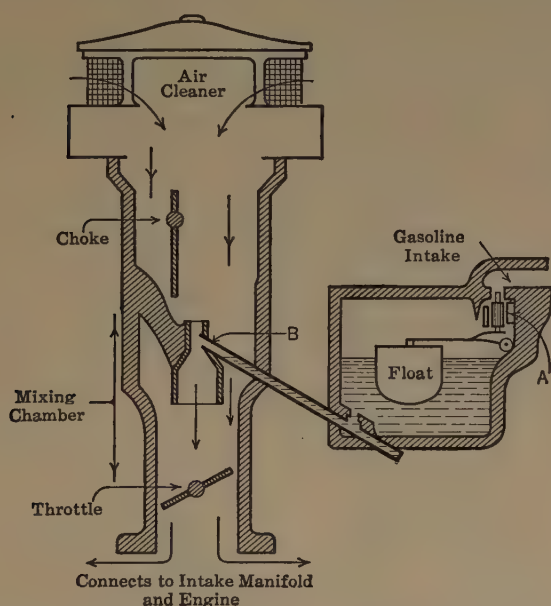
A downdraft carburetor. A. Inlet valve. B. Jet tube for gasoline discharge.
